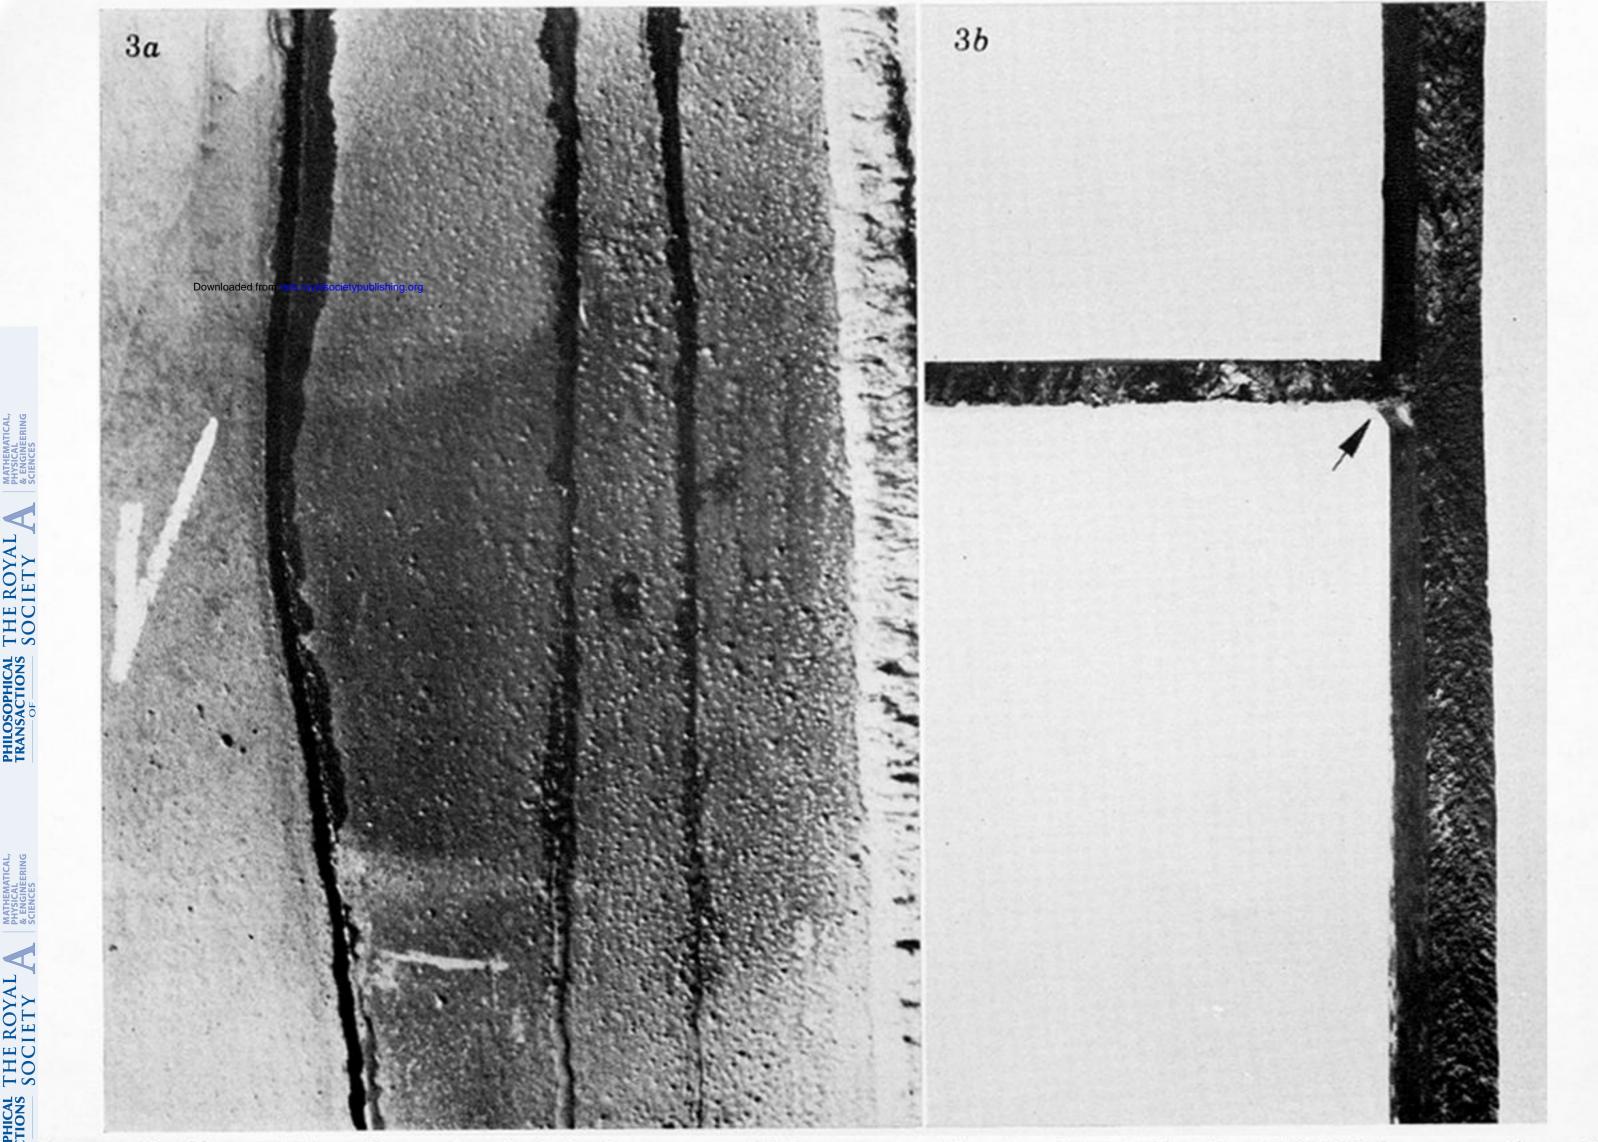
The origin of a major brittle fracture which occurred in the side shell of a 250000 d.w.t. tanker. It originated during storm loading, from lack of penetration in a butt weld of a longitudinal that was also fillet welded to the plating of the side shell.
